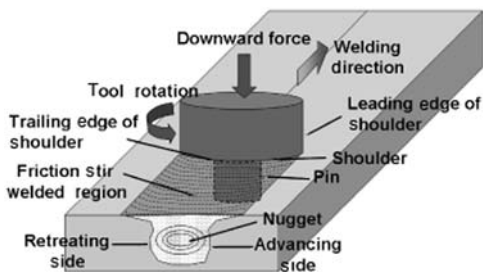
Friction stir welding process. Source: Ref 14
